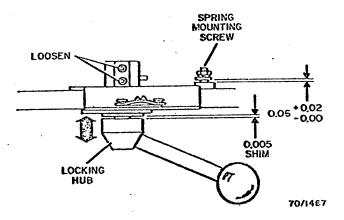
Hub Gap and Spring Mounting Screw Clearance
